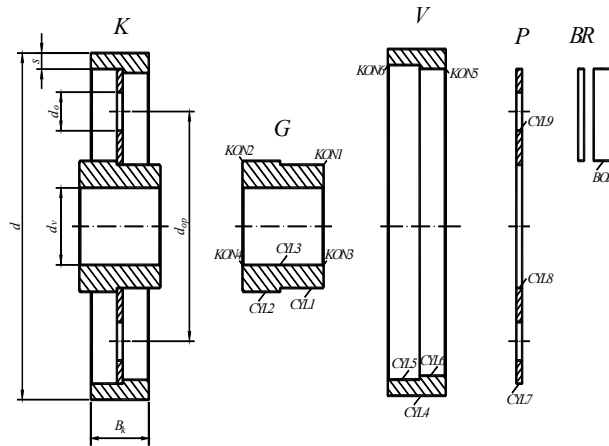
Modelling of belt pulley parts with cylindrical external surface
